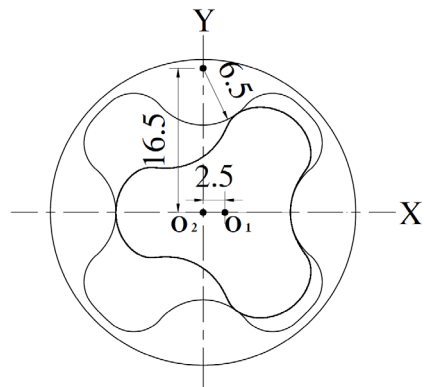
Profiles of inner rotor and outer rotor used in the analysis
